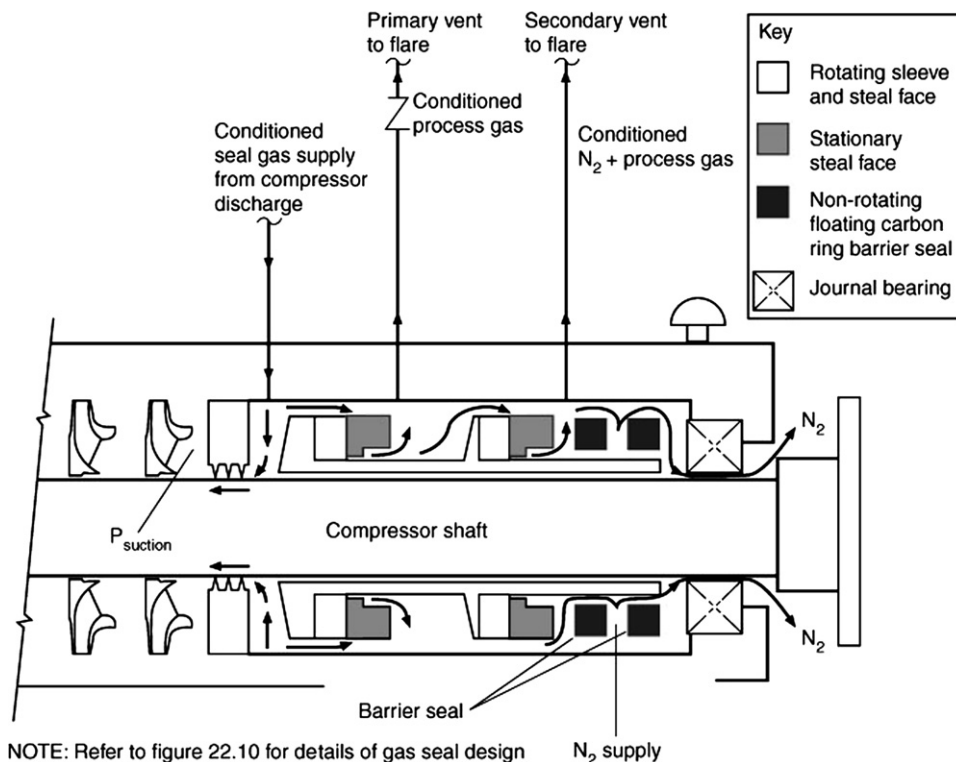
• Tandem seal and barrier seal typical housing arrangement
